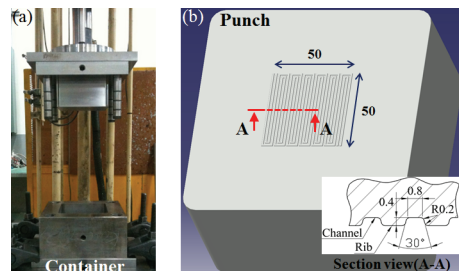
(a) experimental apparatus of rubber forming and (b) design of the punch with channels (unit: mm).
